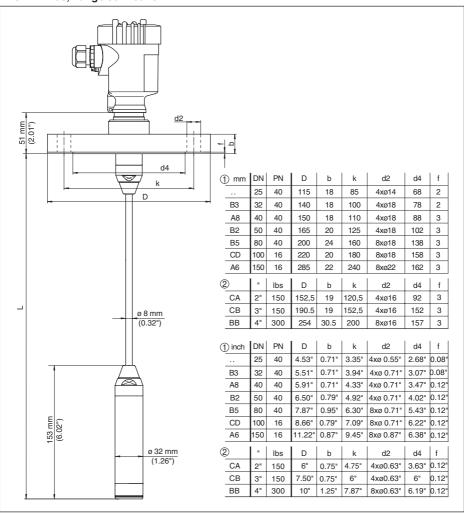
VEGABAR 86, flange connection (example sensor 32 mm)
